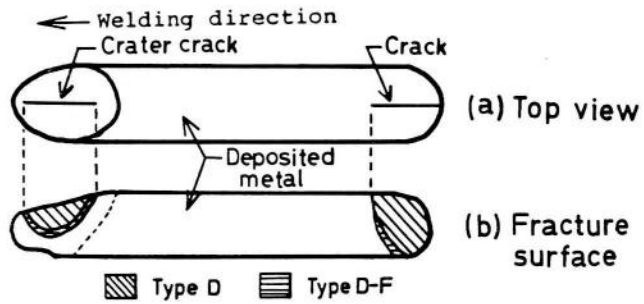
Schematic illustration of crack surfaces in deposited metal in FISCO cracking test showing features of solidification crack surface morphology.
